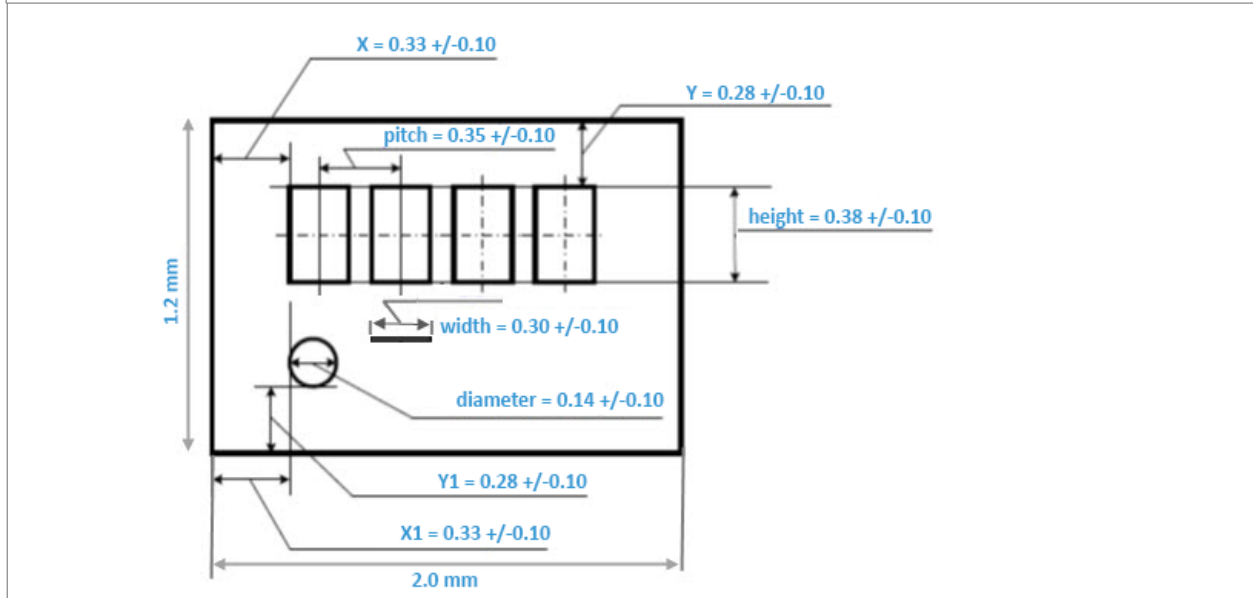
Standard Marking Dimensions for 2.0 mm x 1.2 mm Package
